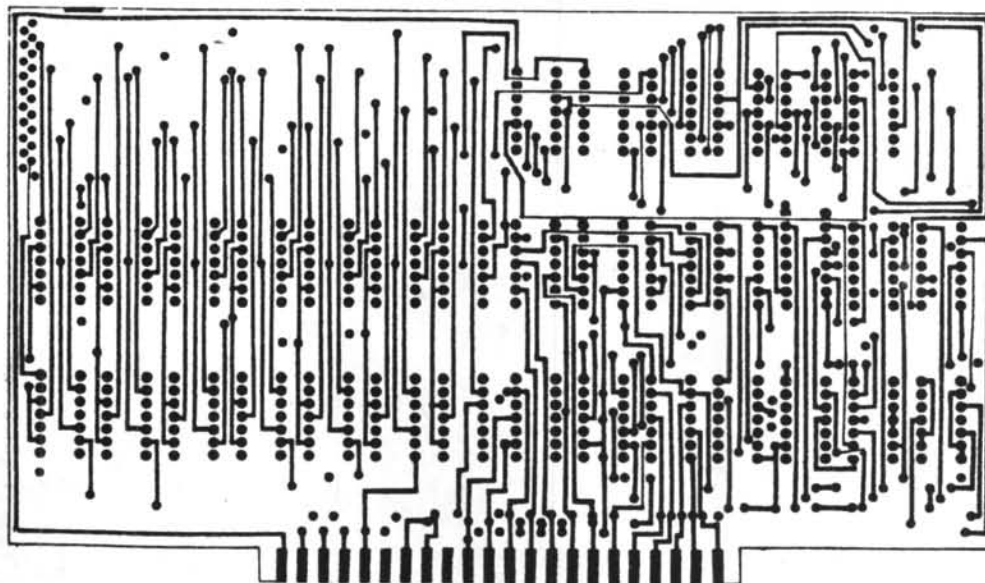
Point, unit, and ranging encoder (A:s:b)-1 ; Component side
